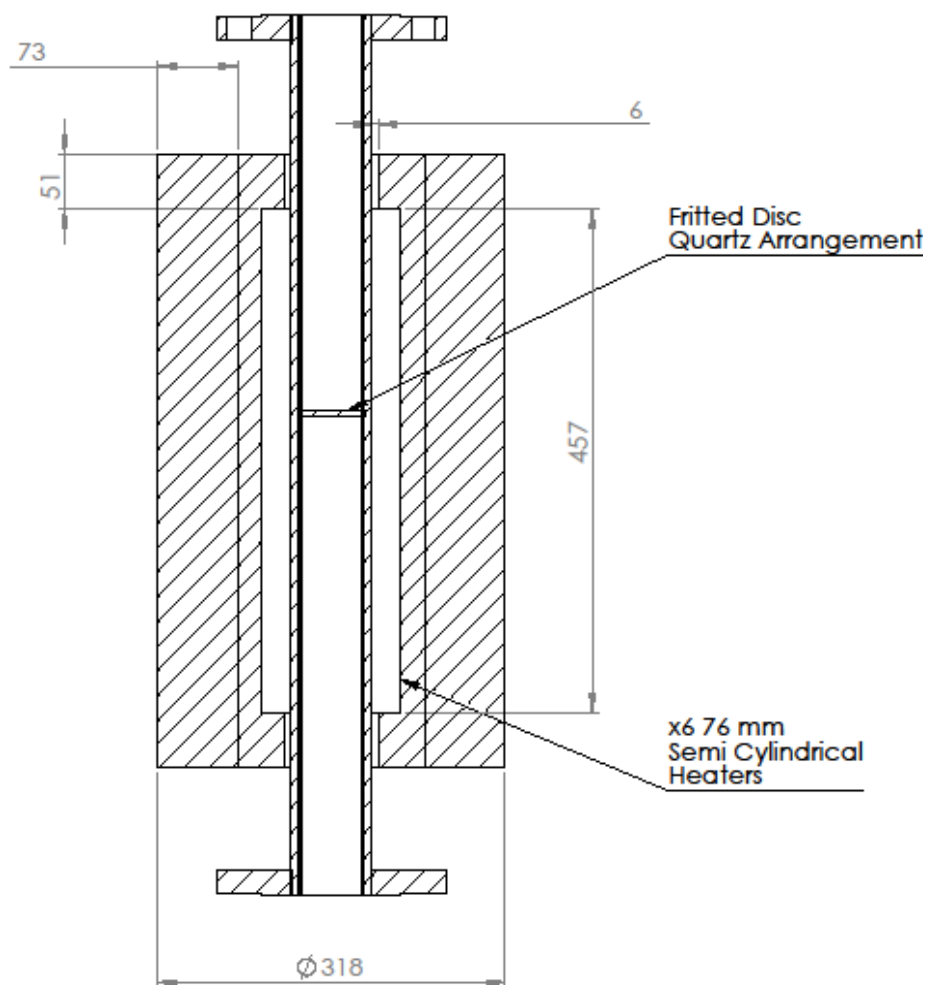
Section view of heater and fluidised reactor pipe configuration with a quartz fritted disc at 400 mm.
